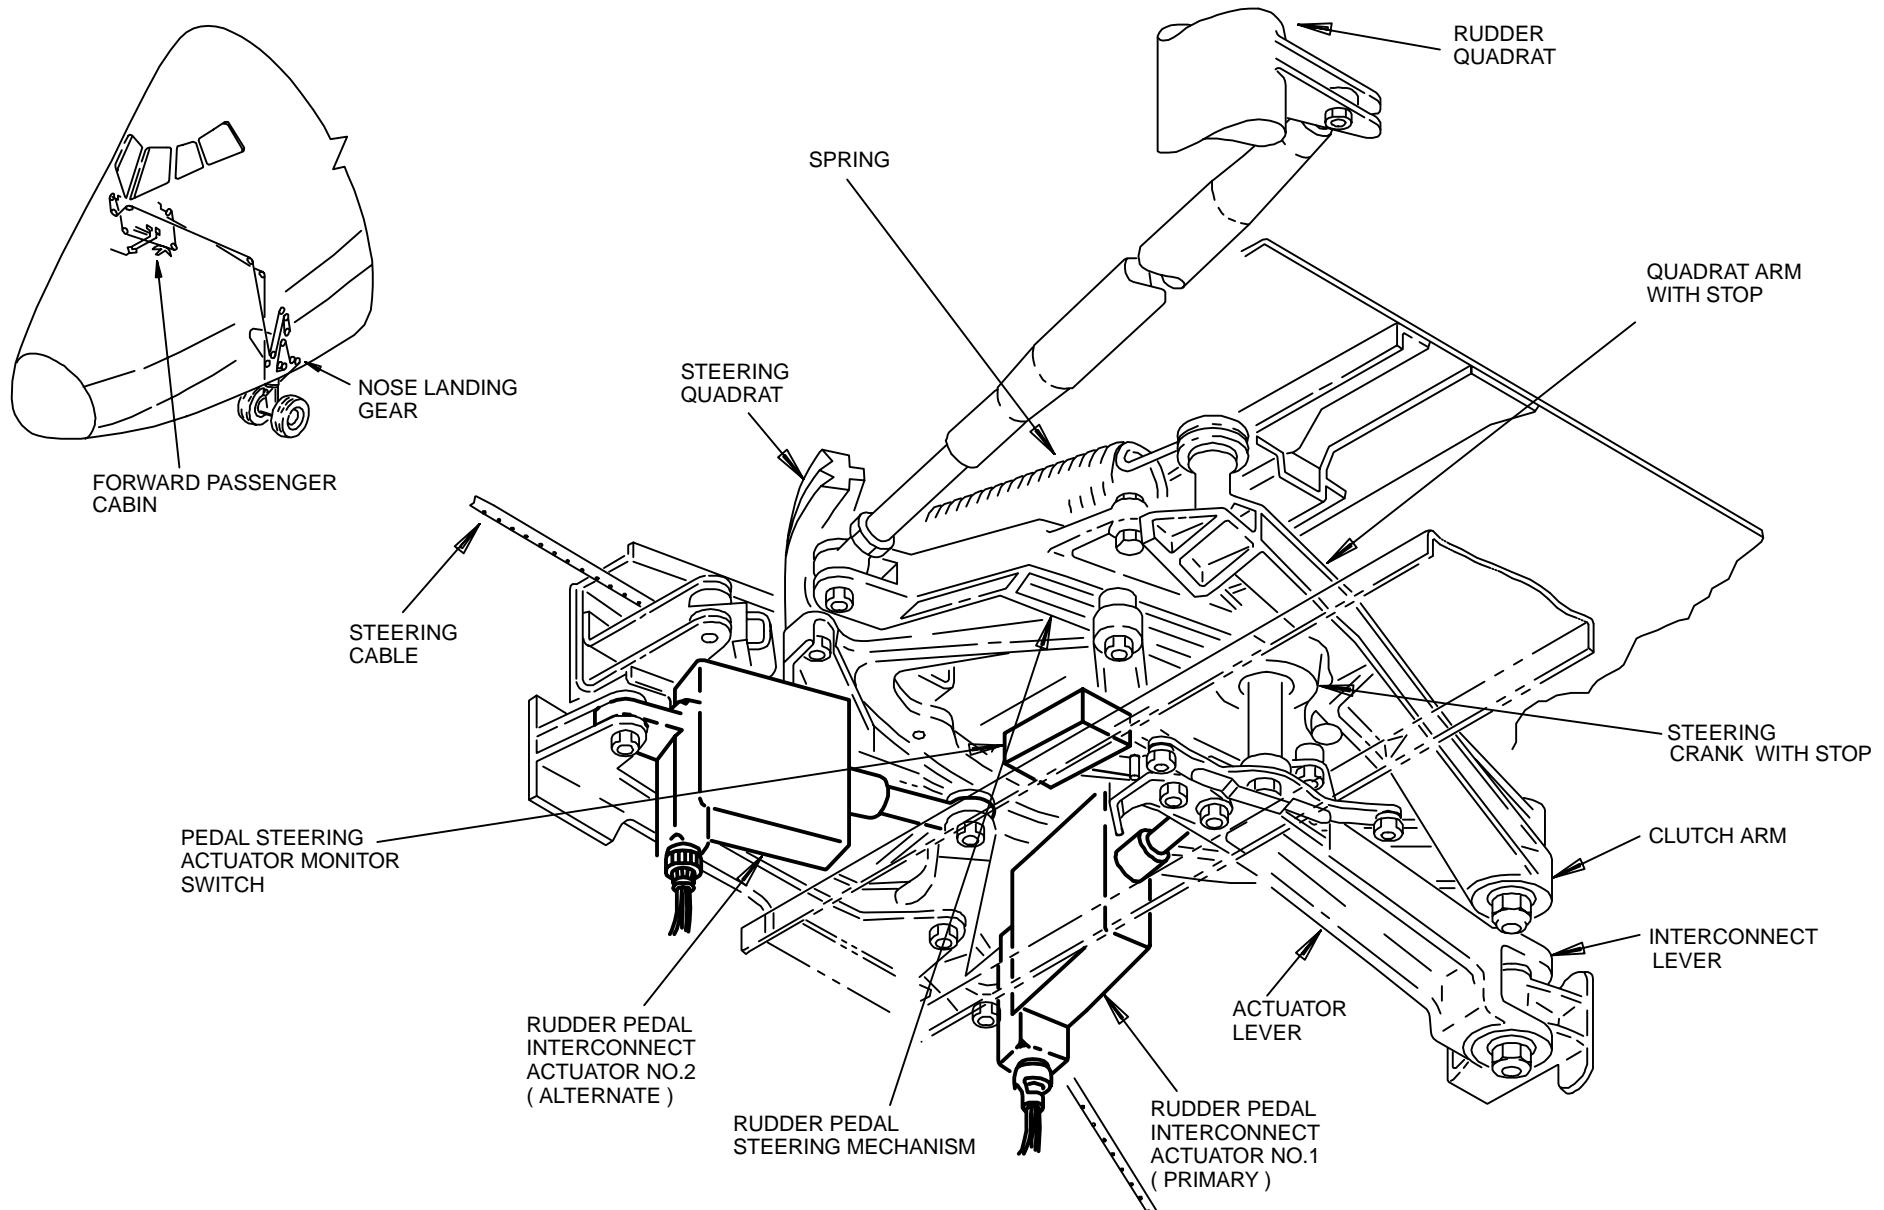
NOSE GEAR STEERING CLUTCH ACTUATORS
